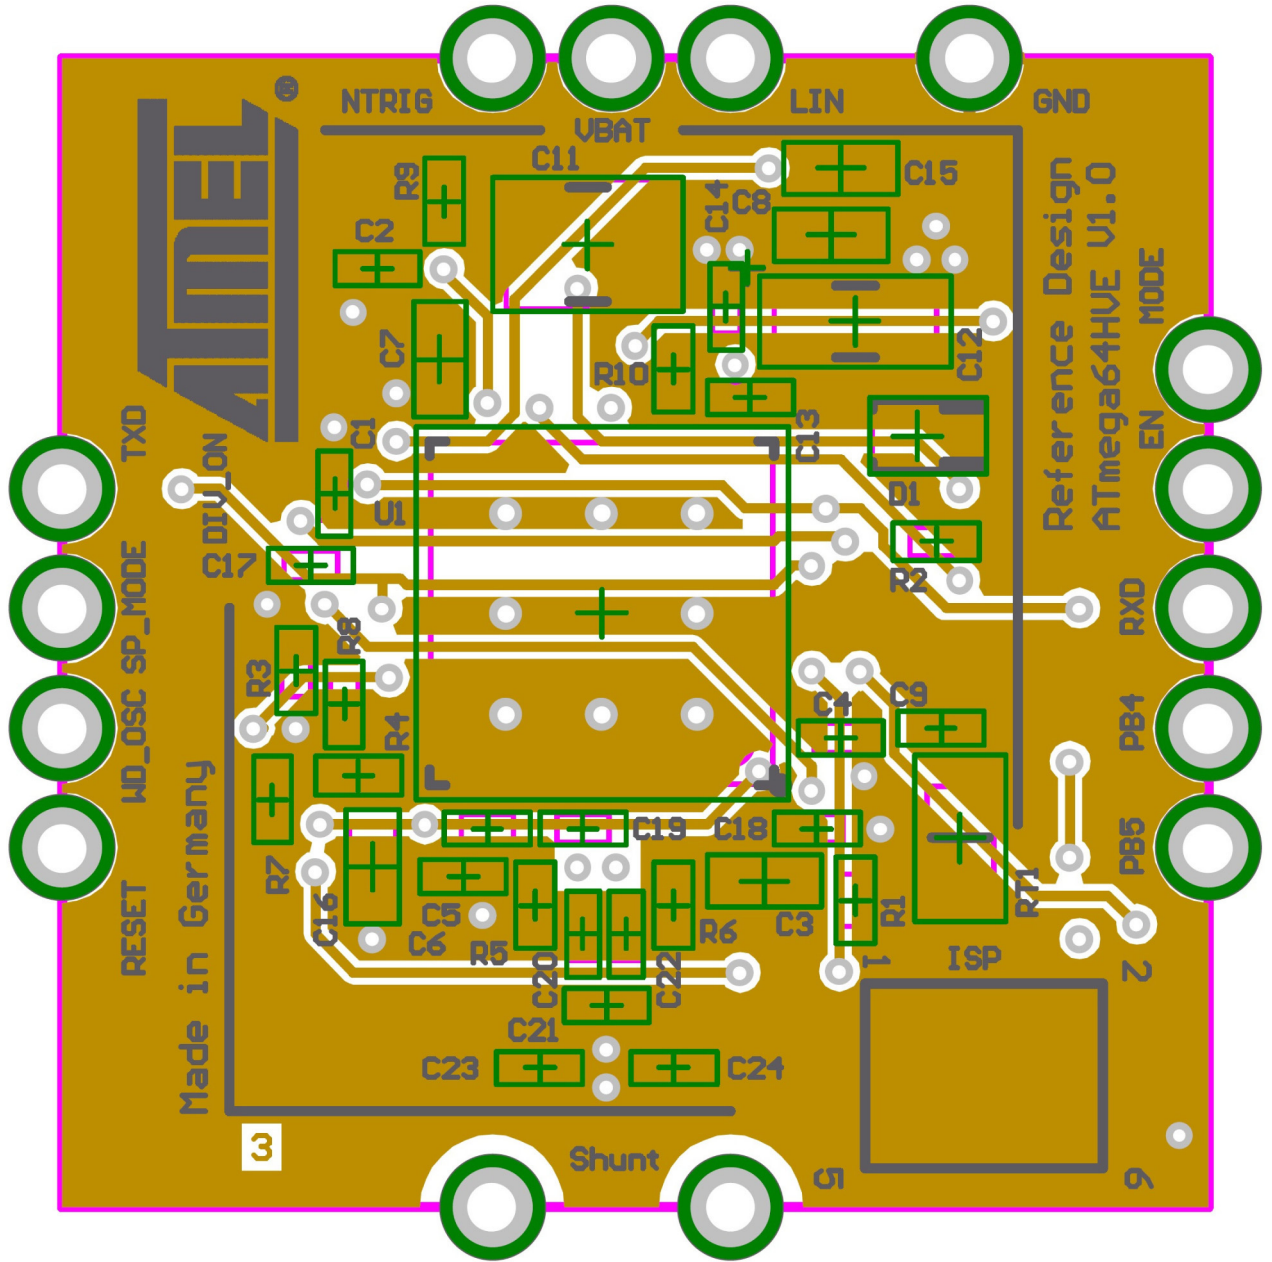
PCB Layout of Reference Design, Bottom Layer (View: Top Layer)
